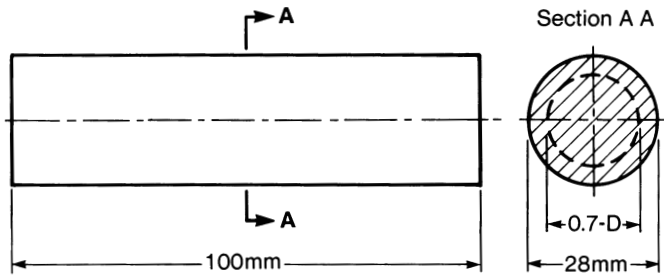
Dimensions of the standard cylindrical specimen used in the QTA method
